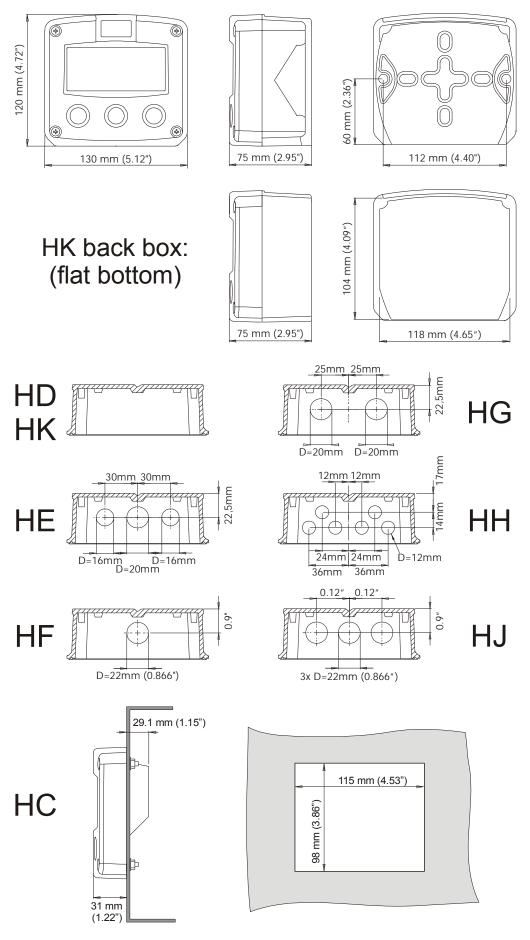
Dimensions GRP enclosures. HF126PEN_EG_IA_TA_v0501_04
